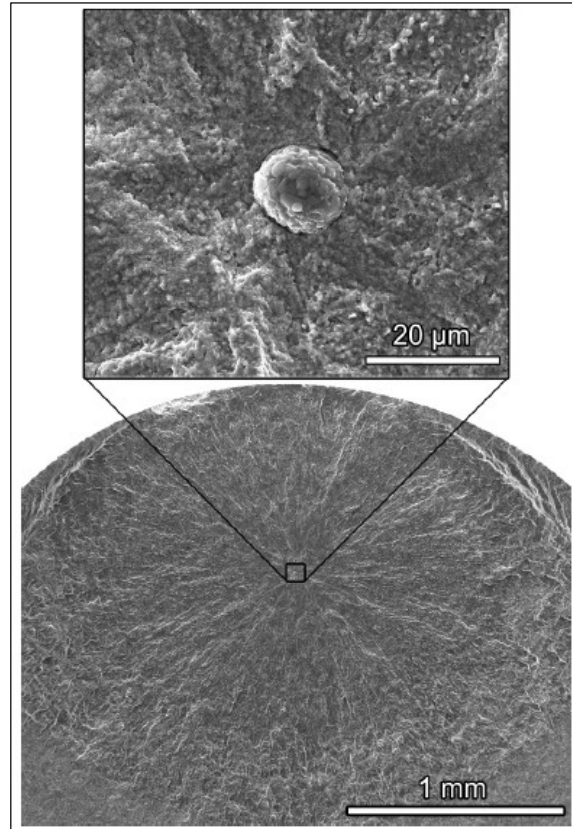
Observation of fatigue failure from internal inclusion [27].
